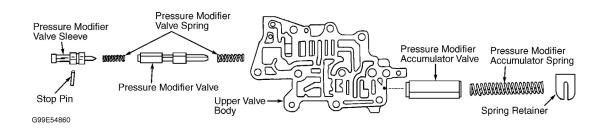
Exploded View Of Upper Valve Body Courtesy of FORD MOTOR CO.
